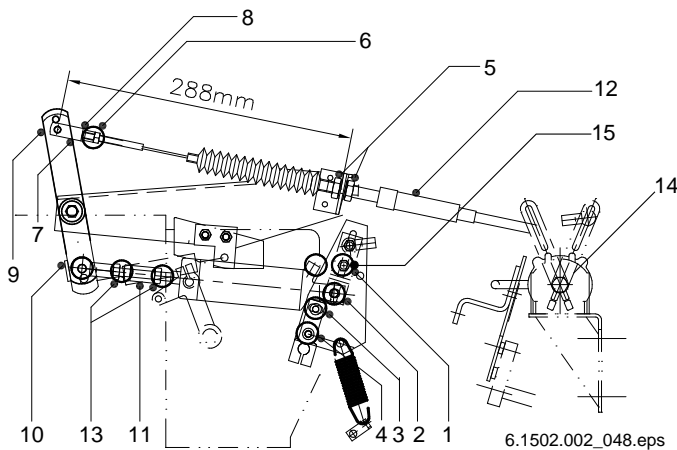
Fitting and adjusting the throttle control at the rear for DAF WS/RS engines
